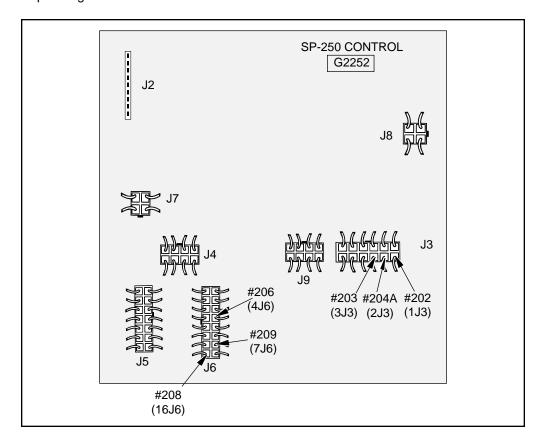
A - G2252 Control PC Board Main Transformer Test Points.
